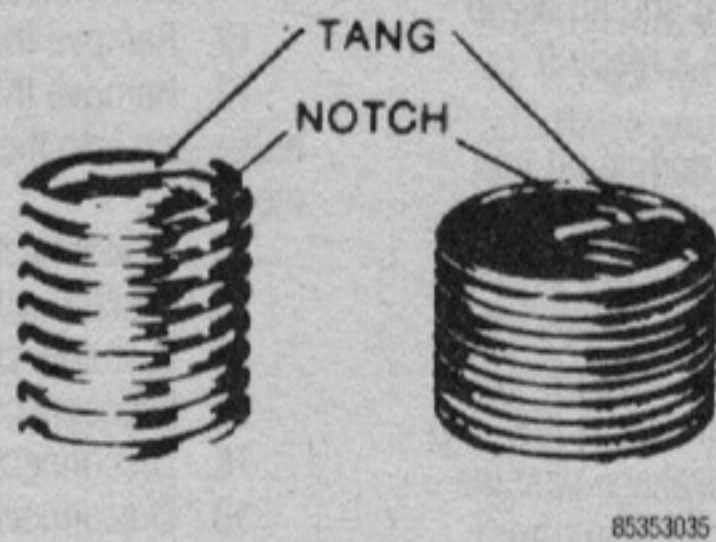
Standard thread repair insert (left) and spark plug thread insert right
